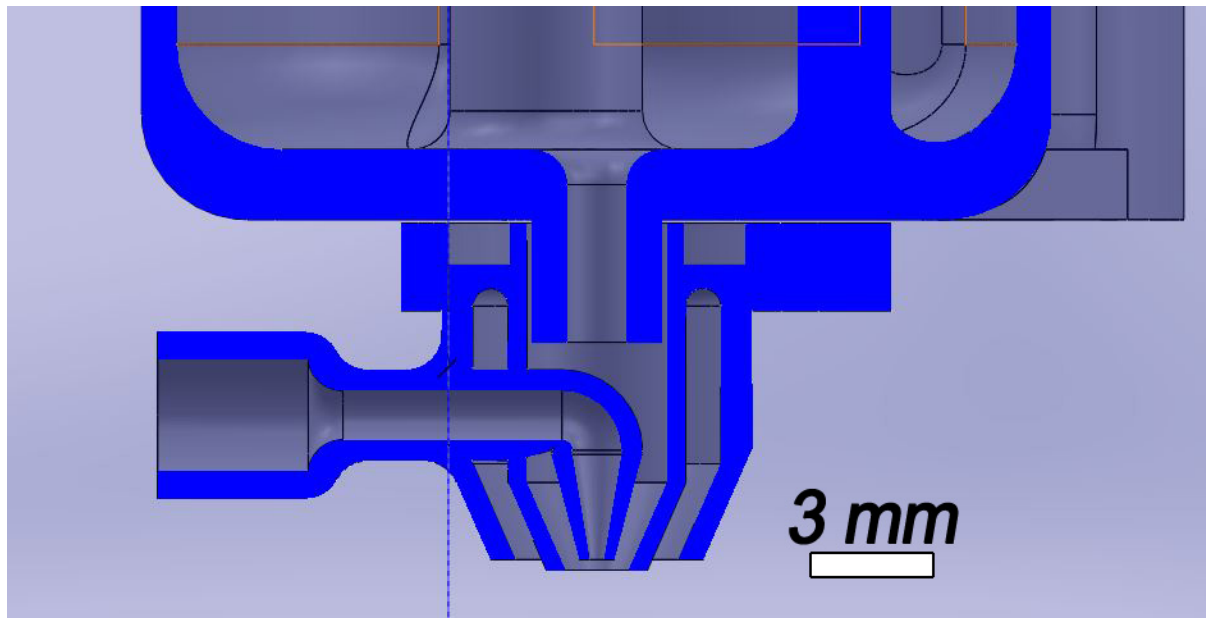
Cross section of nozzle design 7 - a simplified design by eliminating the adjustable needle and integrating the inner air channel into the 3D printed part.
